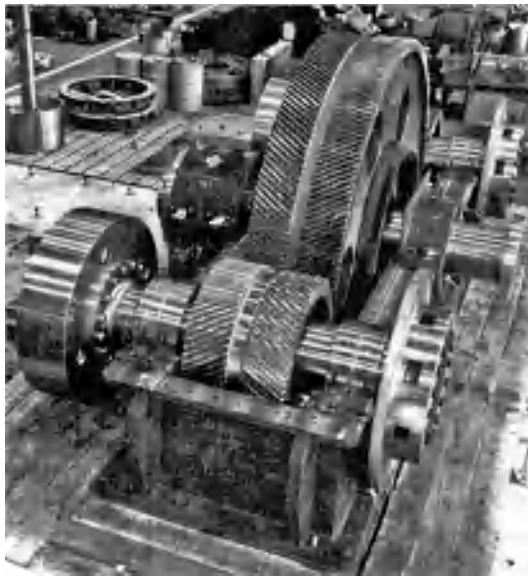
Gearset for a twin-engine, single-screw ship. (Philadelphia Gear Corp.)
